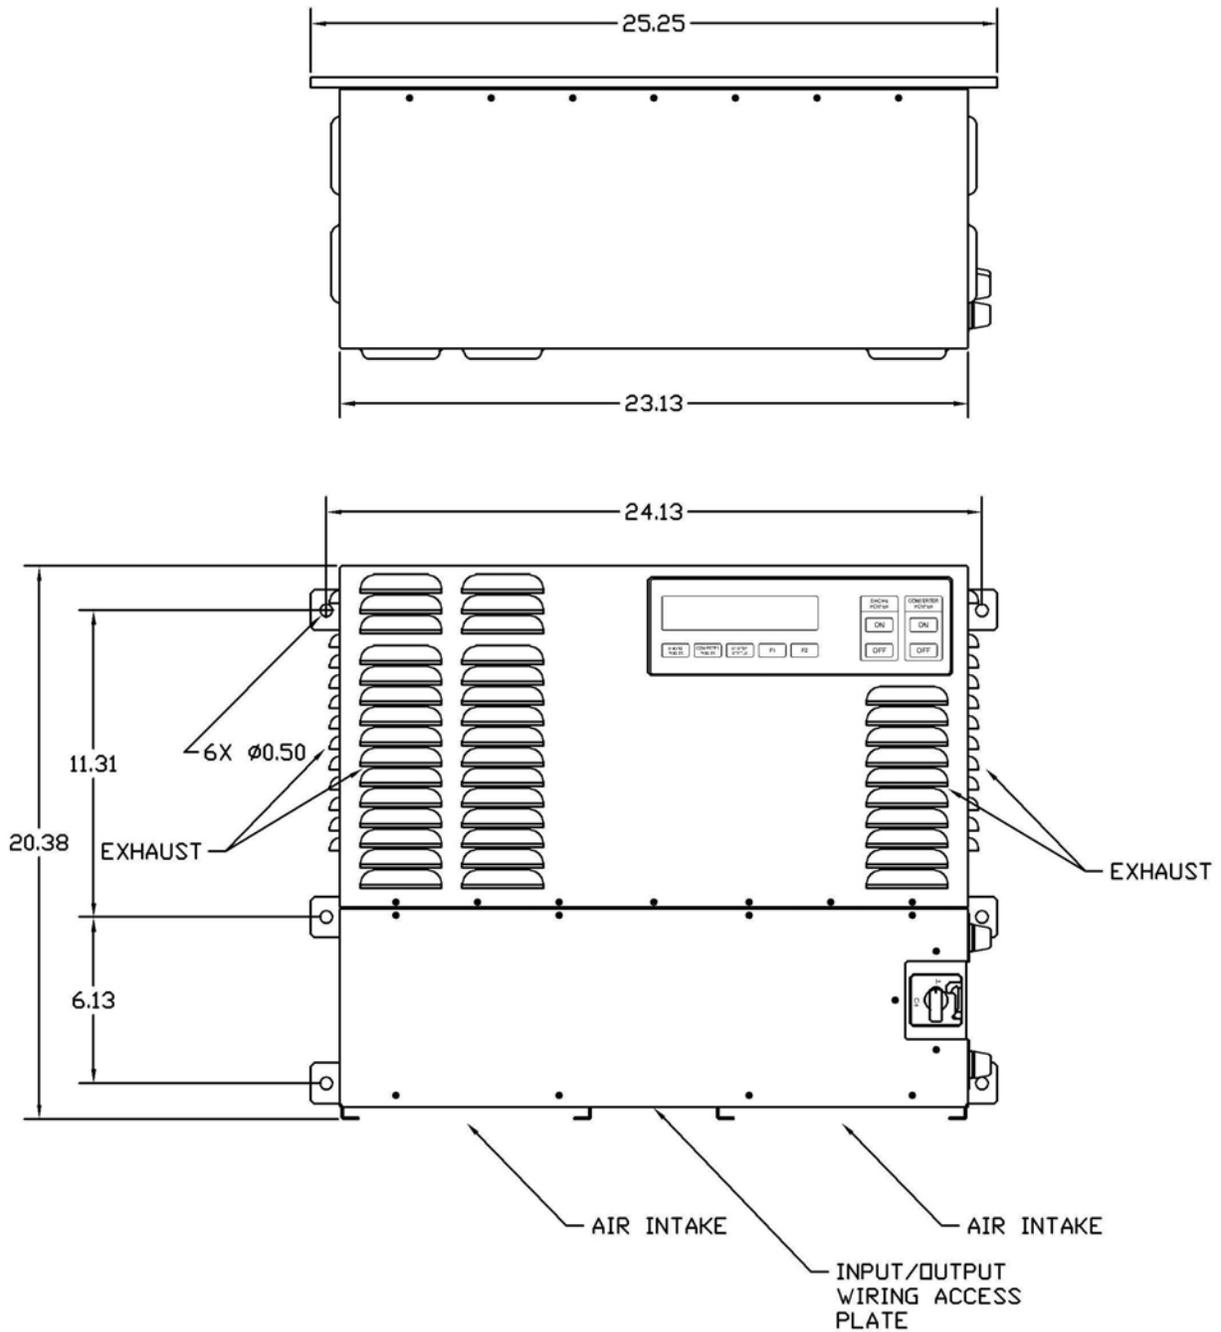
MECHANICAL OUTLINE, FRONT AND TOP
